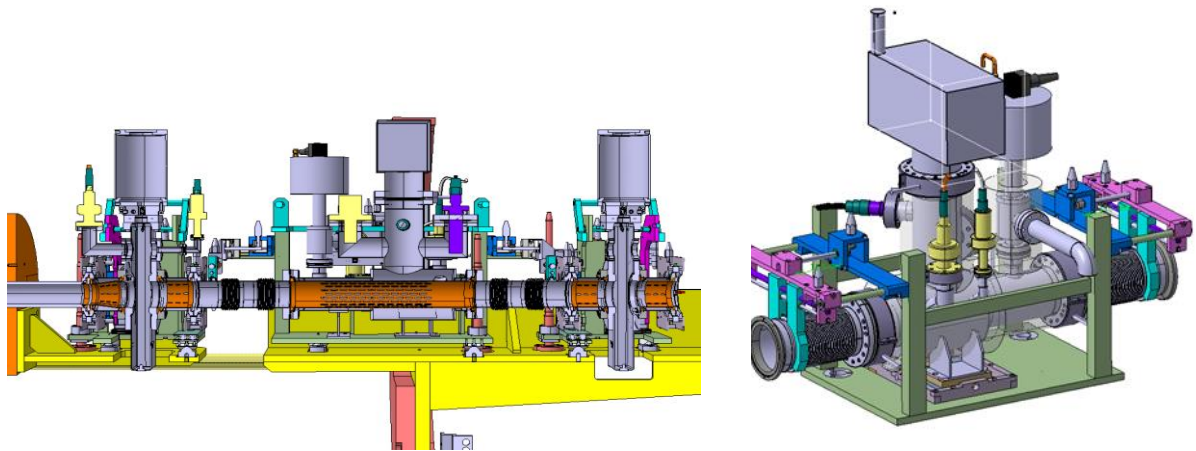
[Left] Cut of the Vacuum module assembly (VAX) to be installed on the IP side of the TAXS with all-metal gate valves. Right: the valves are closed in case of remote exchange of the vacuum pump module (Right). Note that the cantilever support structure is not shown in the right picture.
